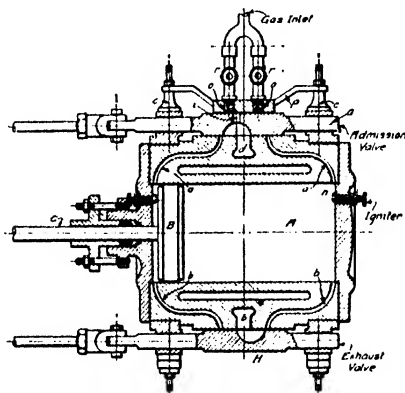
Horizontal Section of Cylinder and Valves of Lenoir Engine
